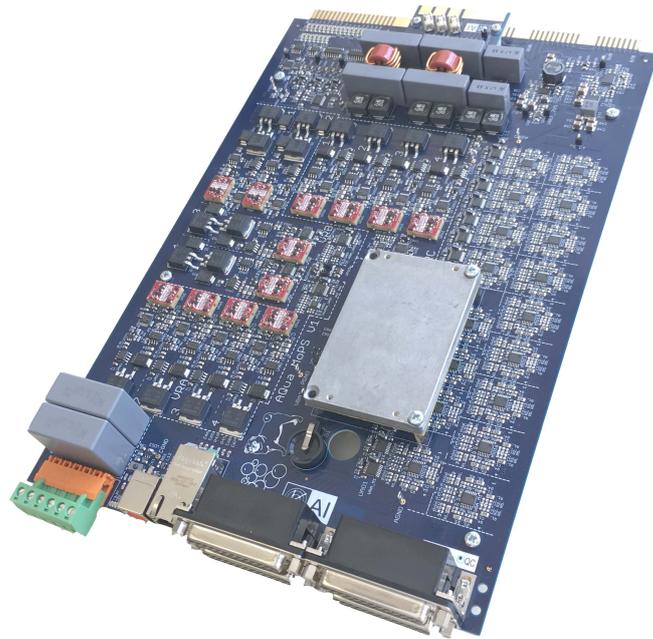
Aspect view of the final manufactured PCB of the FPGA-based control module. The core sub-module sbRIO-9651 is located approximately in the center which is the solid light gray block. In the top area, the long PCB edge connector which interfaces the backplane connector in the test system can be seen. On the bottom, the black sub-D connectors are the interface to the load boards and next to them on the left, the Ethernet connector is located.
